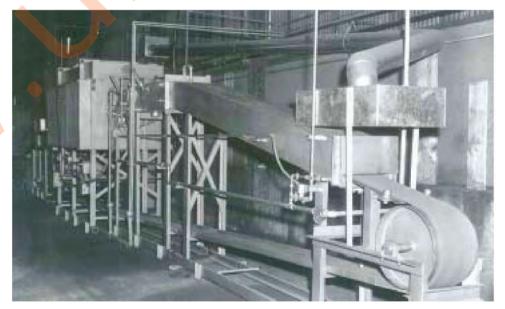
"Hump-back" furnace used to manufacture small assembled parts.
